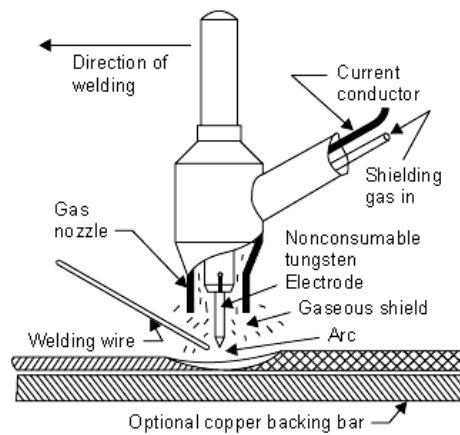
Tungsten Inert Gas (TIG) Welding
